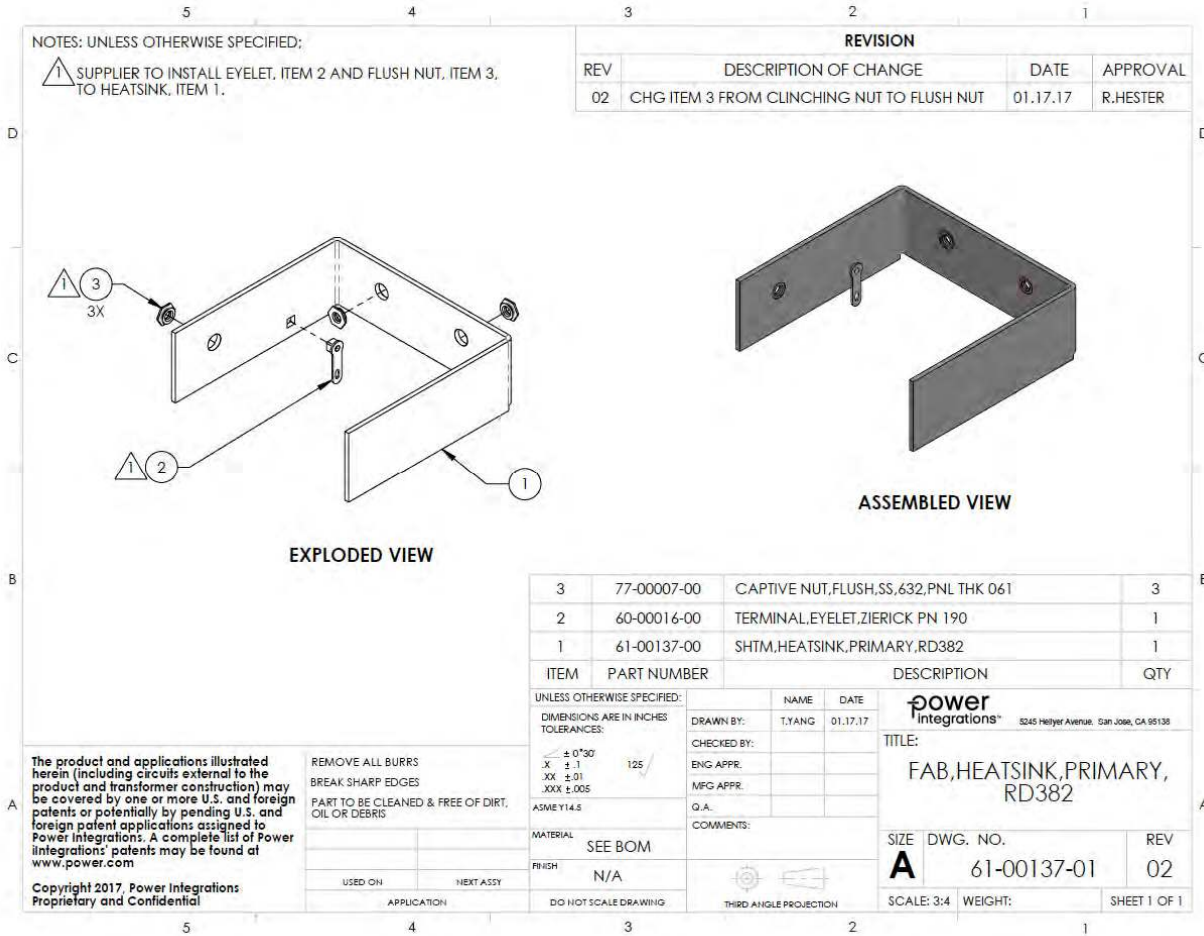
Finished Primary Heat Sink Drawing with Installed Fasteners.
